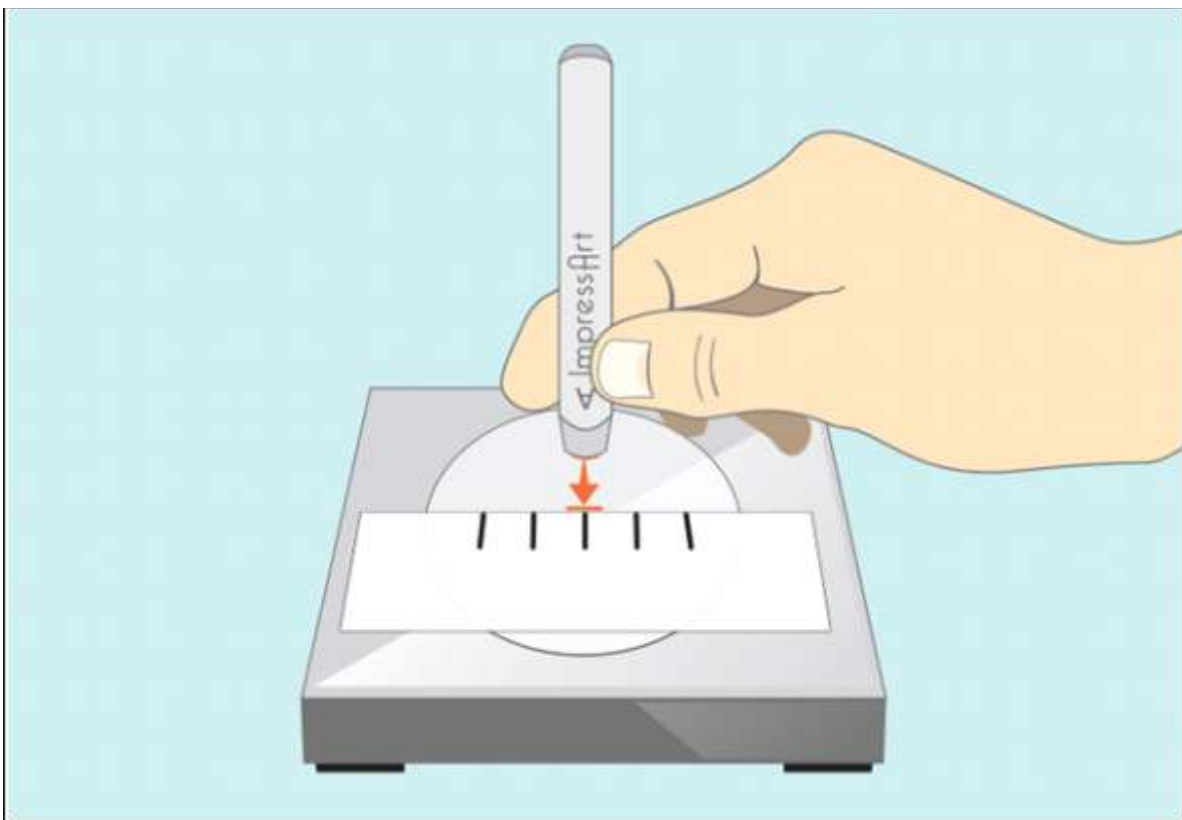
Lightly Drag the Stamp to the Edge of the Tape
